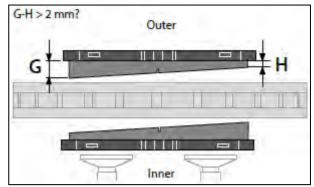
EXAGGERATED TANGENTIAL OBLIQUE WEAR OF BRAKE PADS
